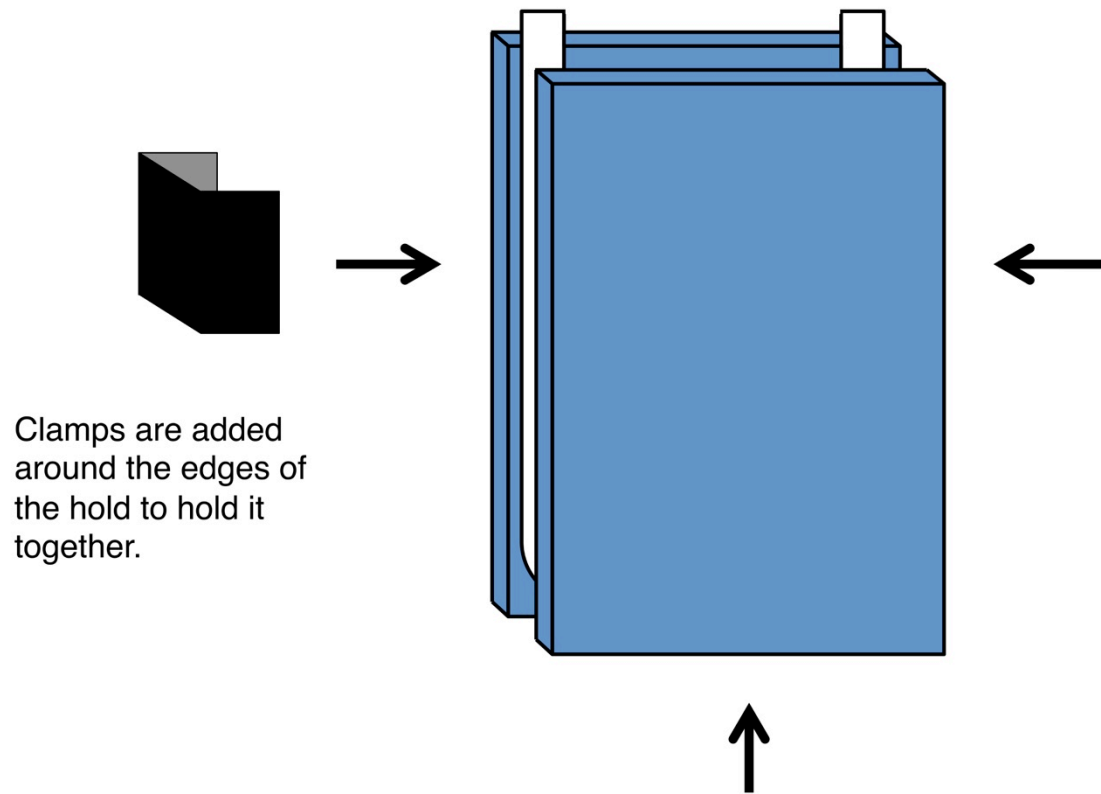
Metal clamps are secured onto the edges of the mold. This holds the mold together.
